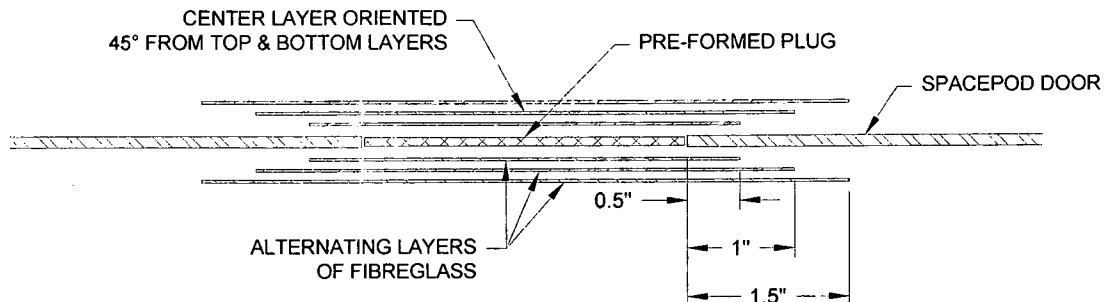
LATCH HOLE REPAIR IN SPACEPOD DOOR
